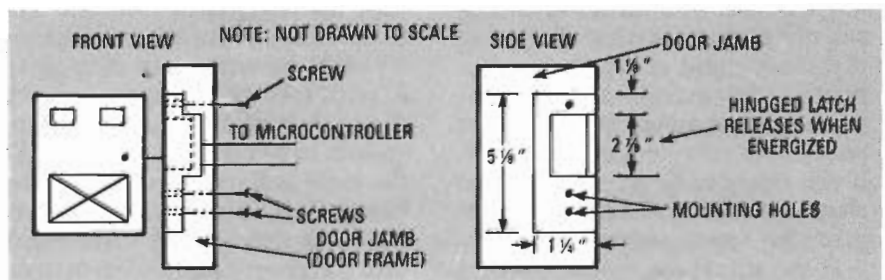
MOUNTING DIMENSIONS for the prototype door latch. This is only a guide; measure your own unit carefully.
